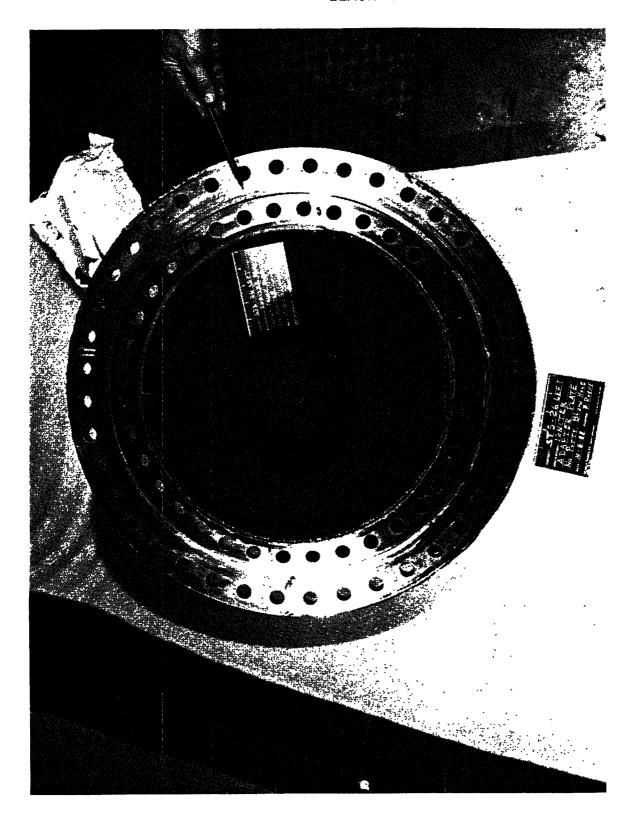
Igniter Adapter Plate Corrosion Left Motor
